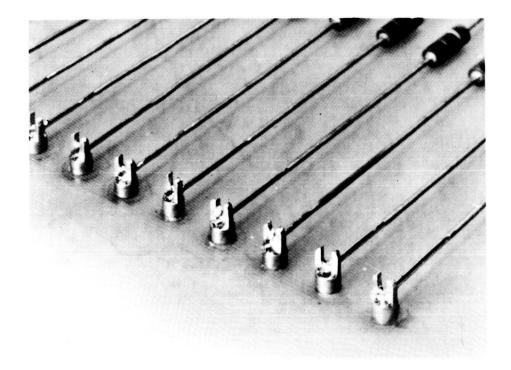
Solder joint specimens of 1/4-watt axial lead resistors soldered to solder-coated bifurcated terminals. Specimen No. 1.5 (R105005).
